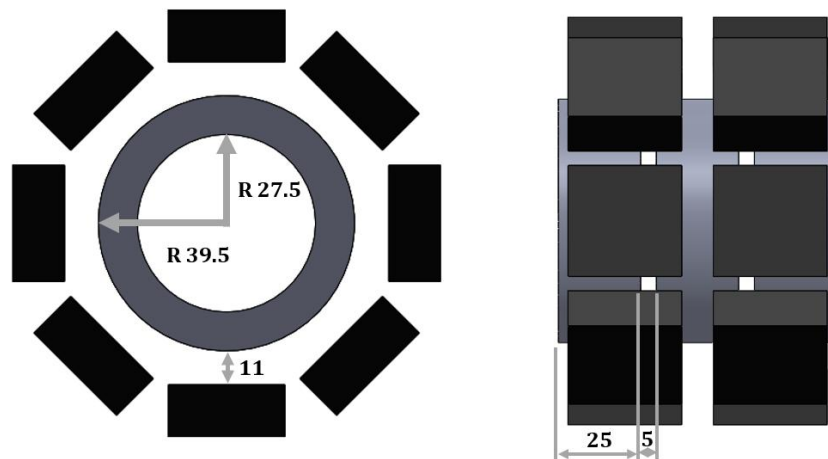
Detailed geometry and dimensions of the new SMB design - rotor D5.
